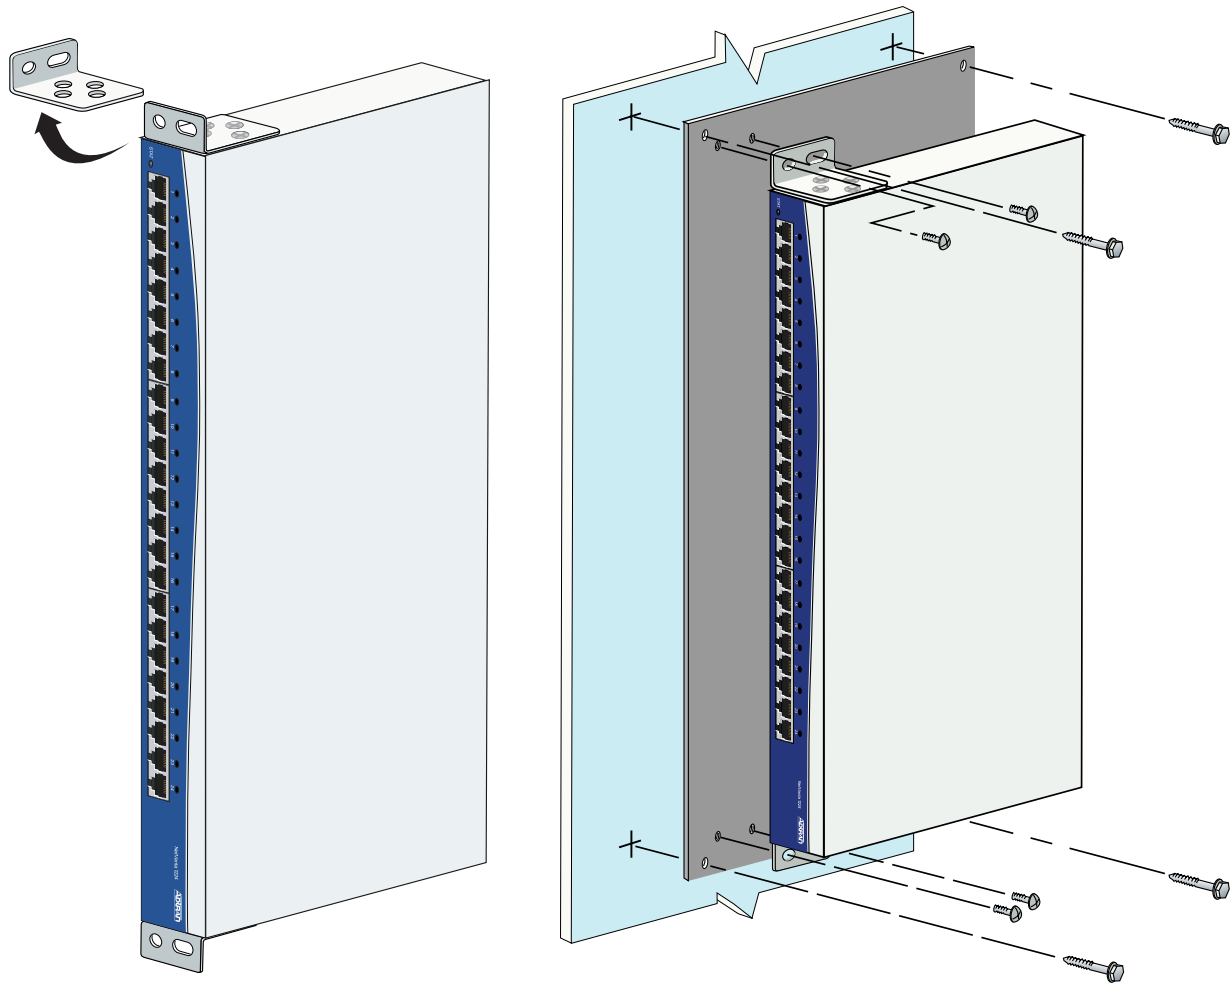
Repositioning the Mounting Bracket for a Wallmount Installation
